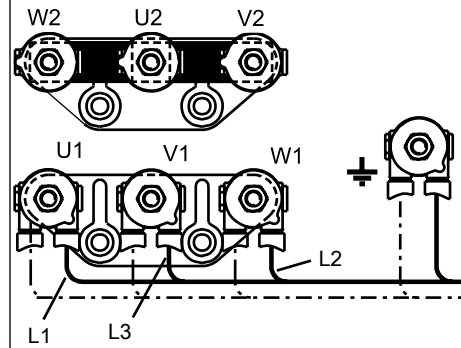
Drive units 605/615, 665/675; 705/715, 735/745, 765/775
